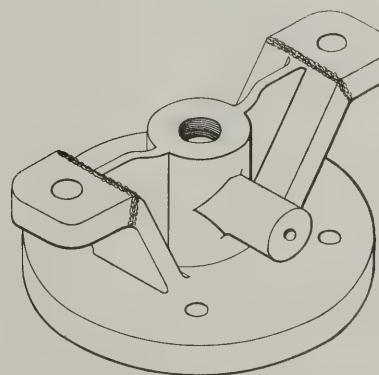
Air Signal Valve Casting Repaired by Gas Welding
